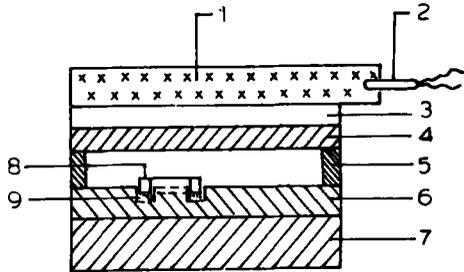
Plane geometry assembly for explosive compaction of ring shaped specimens.
